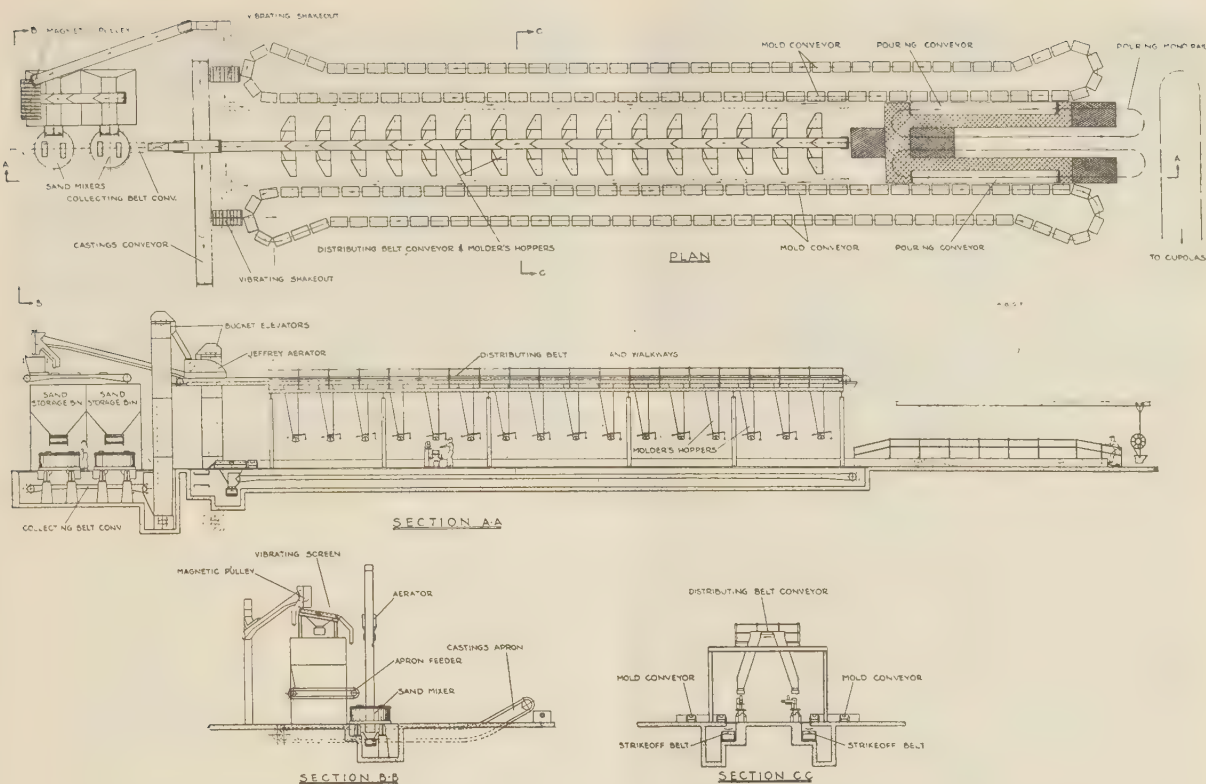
TYPICAL LAYOUT OF A CONTINUOUS POURING SYSTEM, USING CONTINUOUS-POWER-DRIVEN MOLD CONVEYERS
